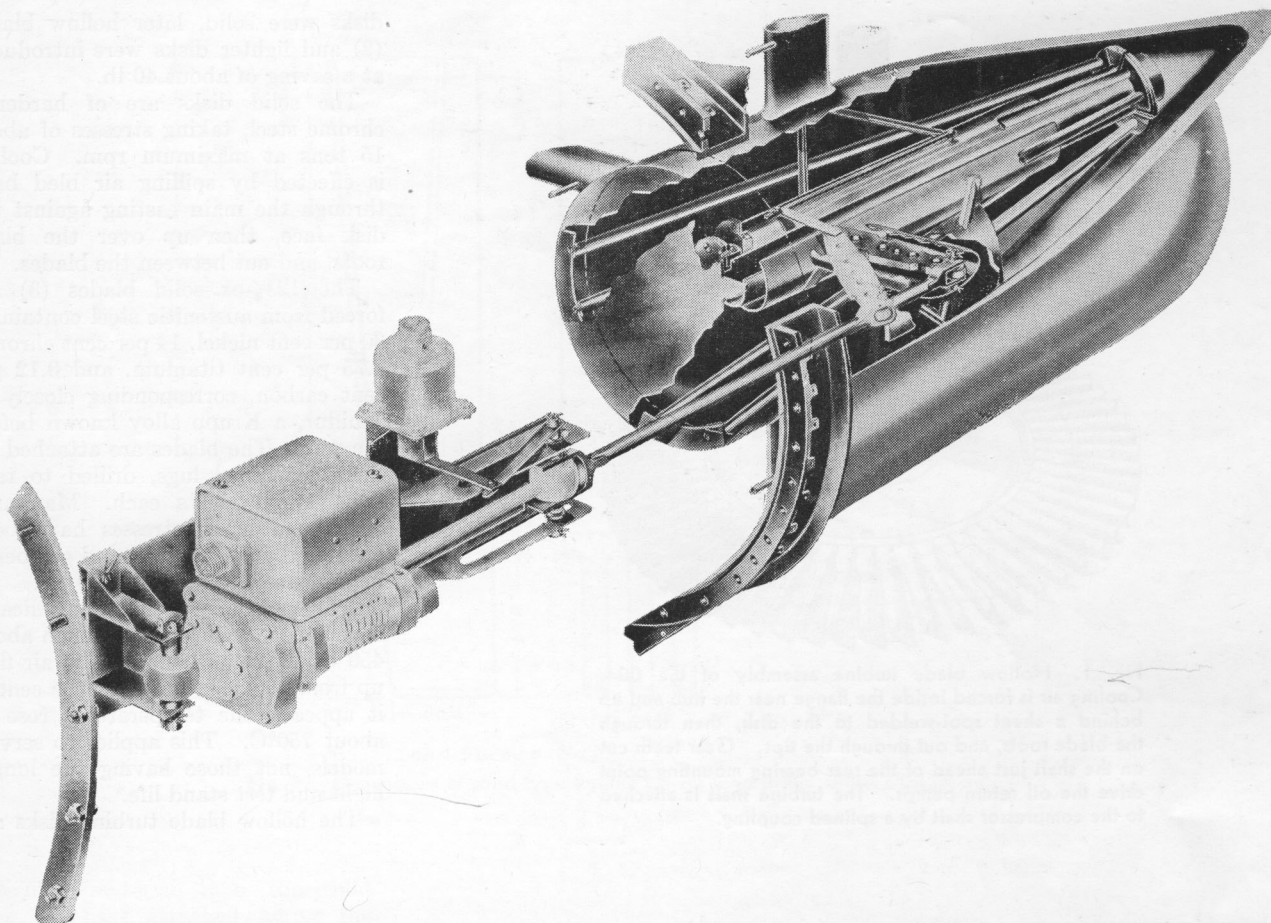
Yankee 19-B exhaust-nozzle assembly cutaway sketch, showing an enlarged detail of the electric actuator for moving the exhaust cone to vary the area of the exhaust nozzle.
